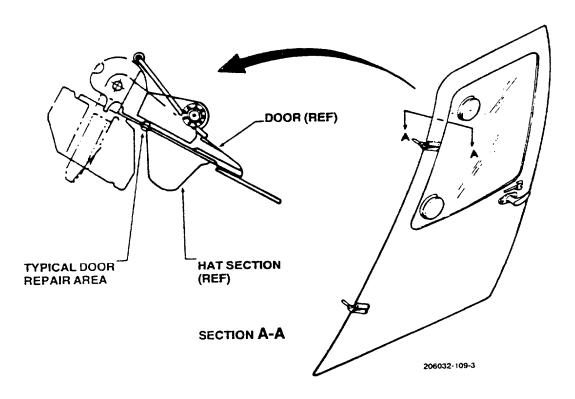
Repair - Stud Tearout and Door Hinge (Sheet 3)
